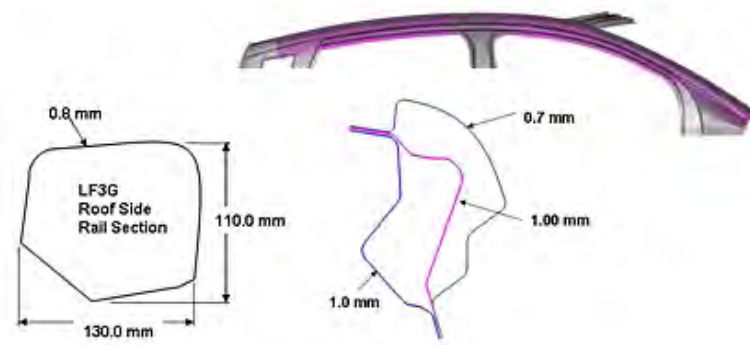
FSV body sub-structure - roof side rail for LF3G FEA
